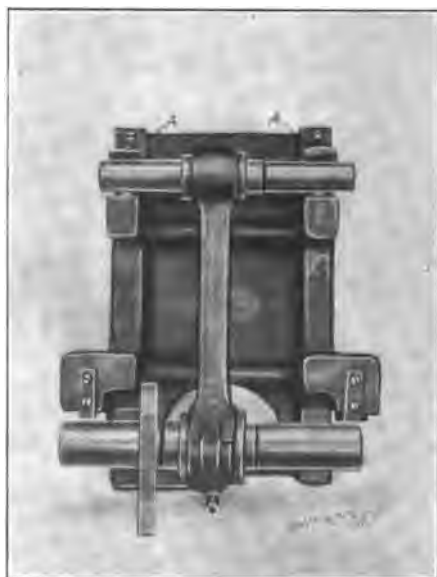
Fixture for Testing the Parallelism of Connecting-rod Bearings
